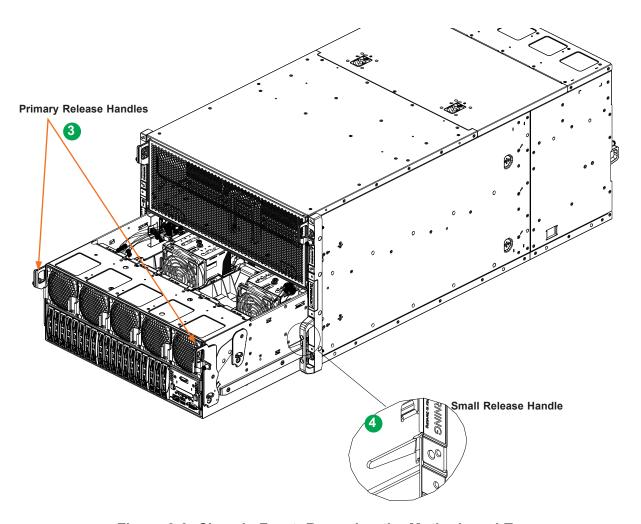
Chassis Front, Removing the Motherboard Tray
